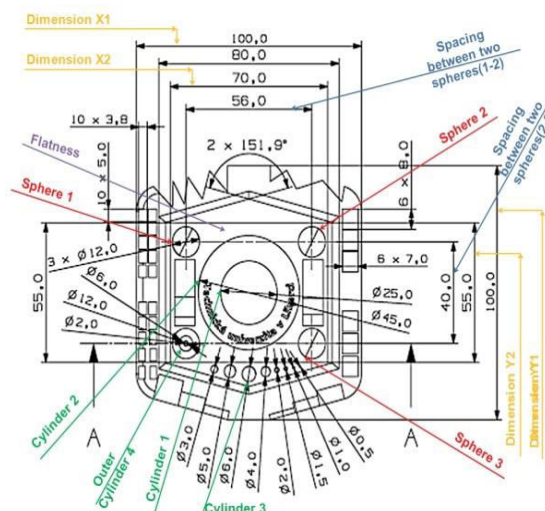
2D drawing of the CAD model with inspection label
